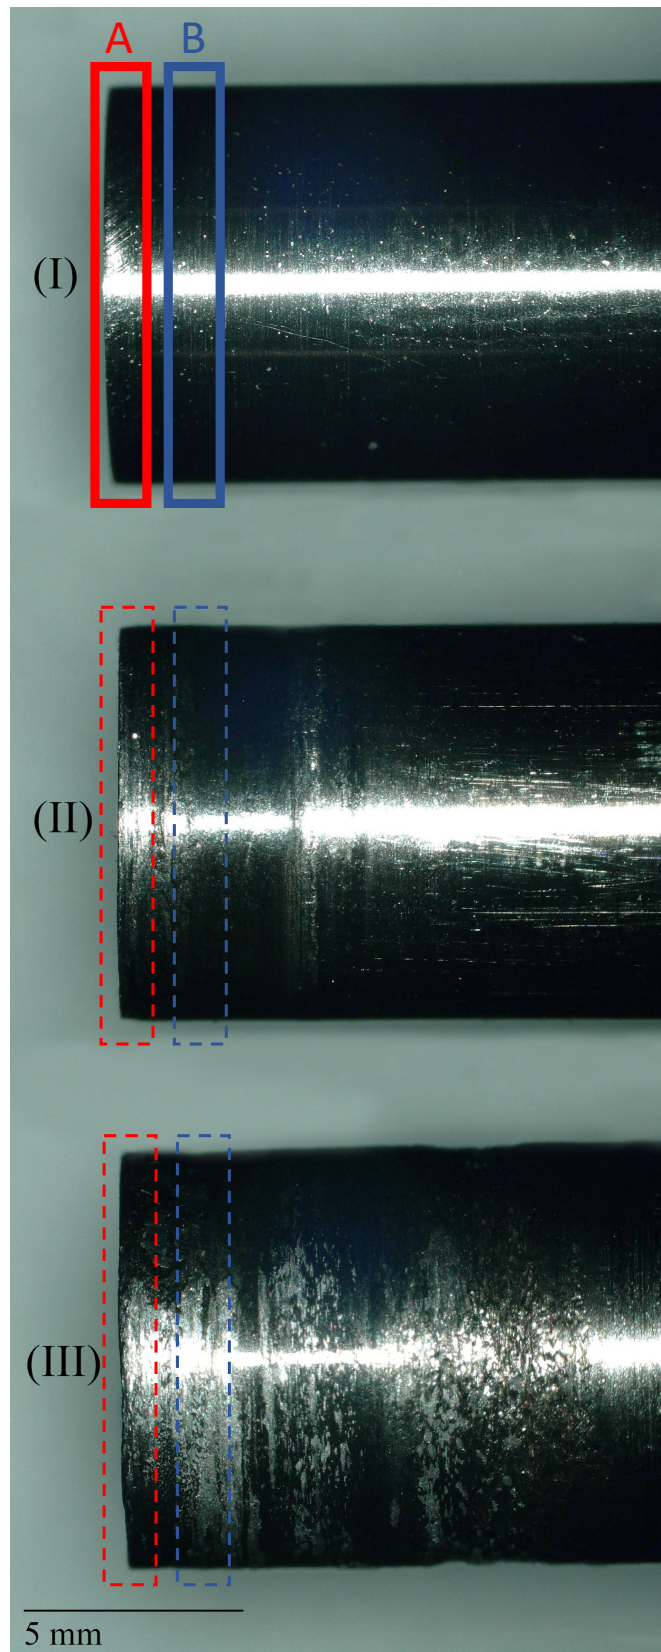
Adjustable shoulder in different wear conditions where: (I) 0 welds performed, (II) 15 welds performed, (III) 200 welds performed.
